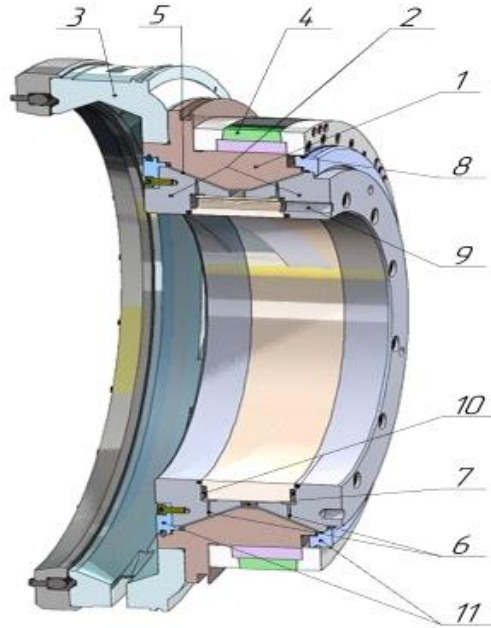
Model of a single-supported non-contact spindle assembly of a semi-automatic single-crystal cutting machine:
